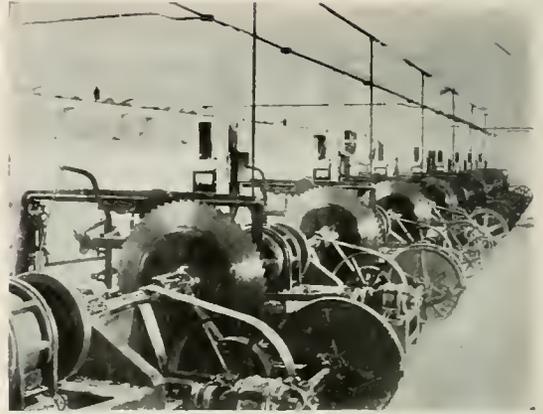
Ten Upright Shingle Machines Each Driven by One 20-h.p., 1800-r.p.m. and One 3-h.p., 1800-r.p.m., Three-phase, 60-cycle, 440-volt Induction Motor
